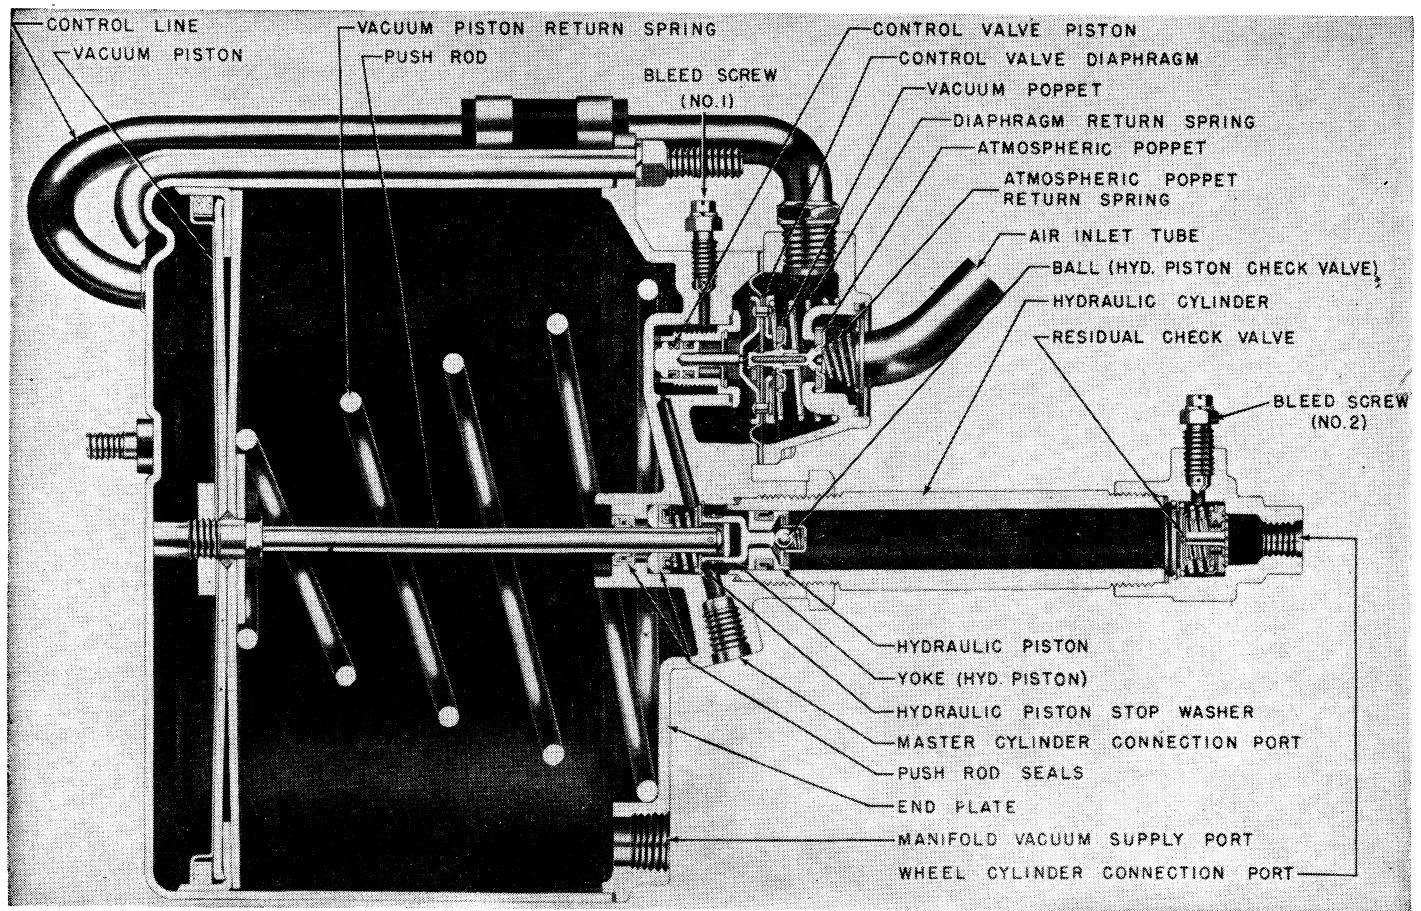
Sectional view of Third Series Hydrovac with single piston
